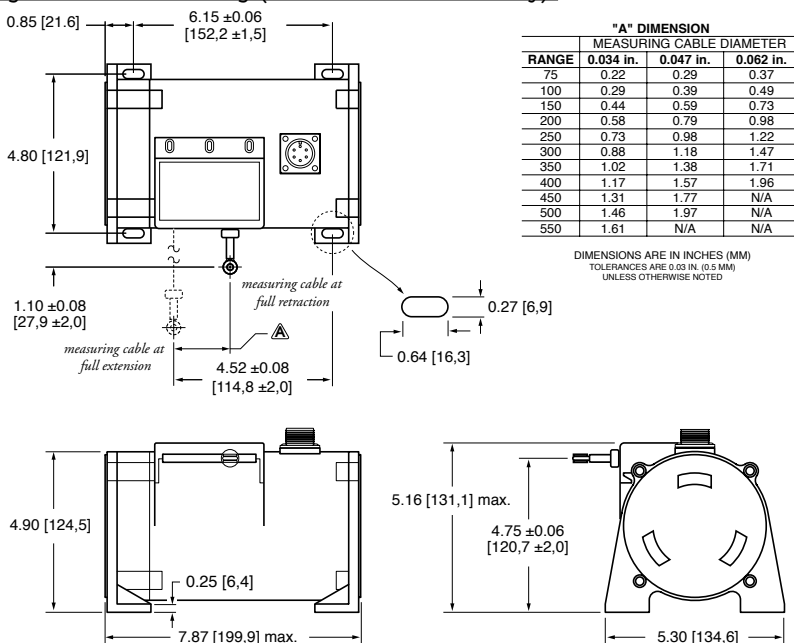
Outline Drawing (26 oz. cable tension only)
